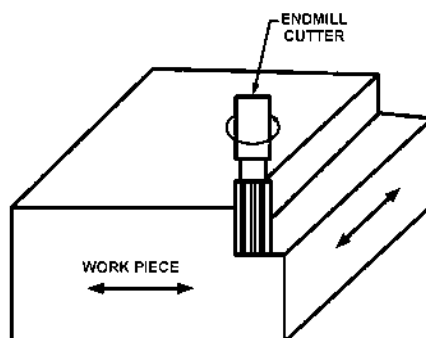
, Producing a single flat surface by using an End mill cutter.
